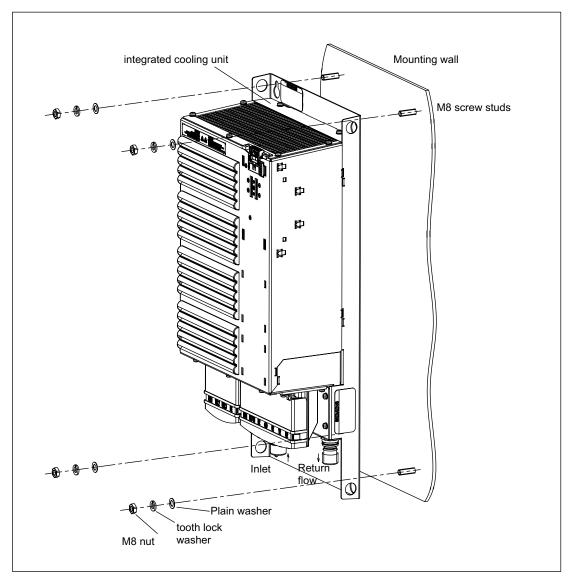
Installation of Power Module PM340 Liquid Cooled with integrated cooling unit (example: frame size FSE)
